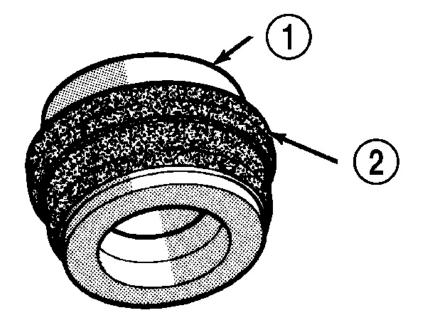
Installing Piston Seal - Typical Courtesy of CHRYSLER LLC
